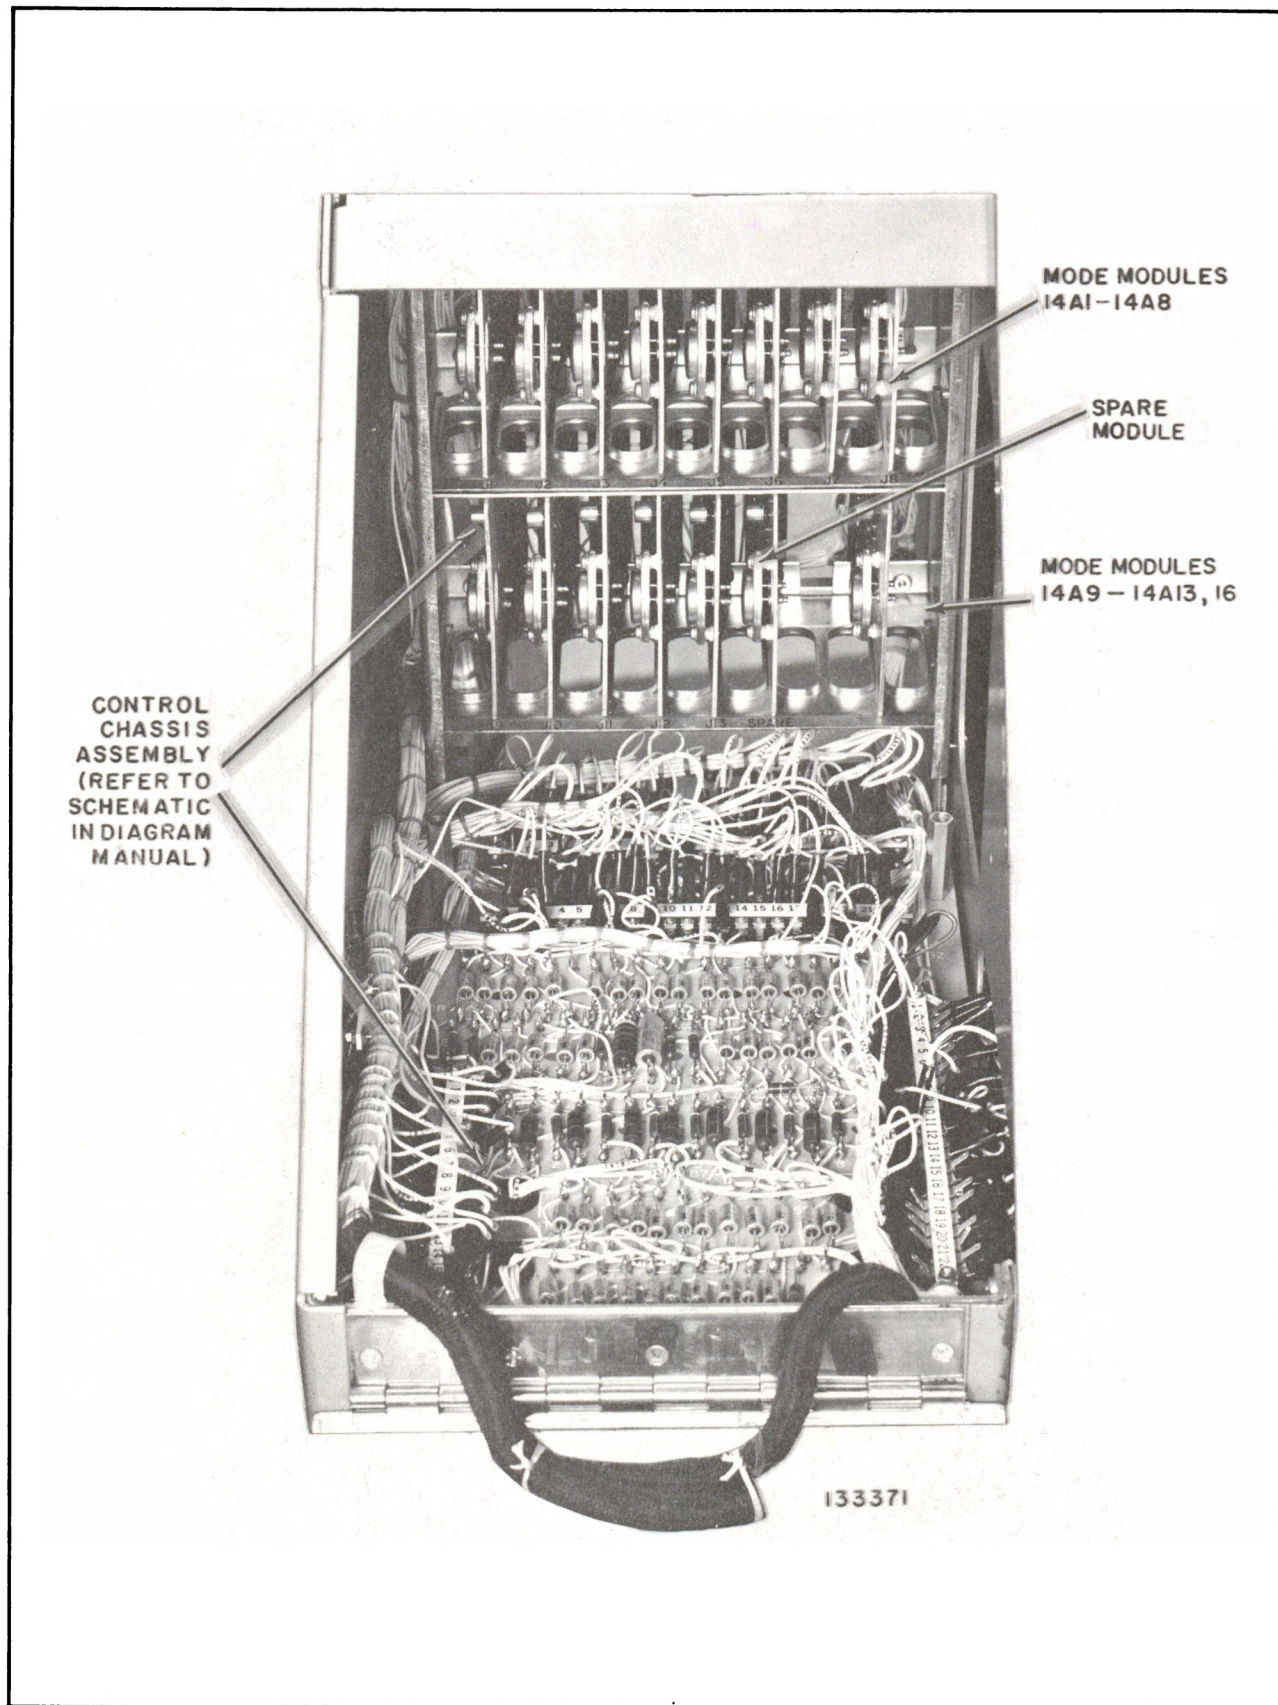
Record Control Panel opened, showing Control Chassis Assembly (14)
